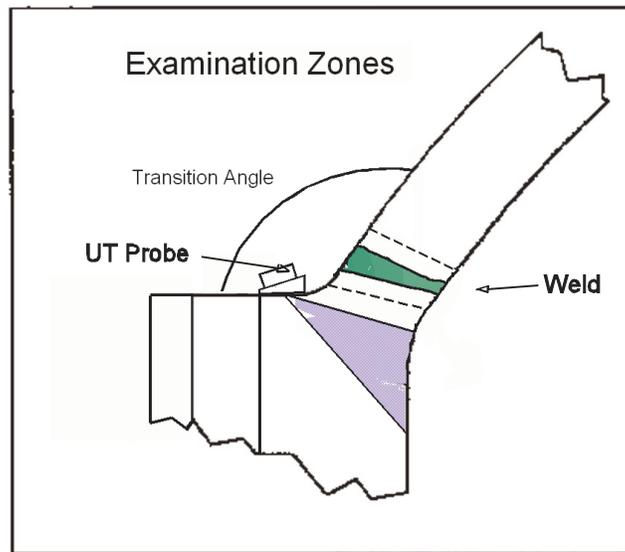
Drawing depicting typical cross-sectional geometry of RPV closure head-to-flange weld.
